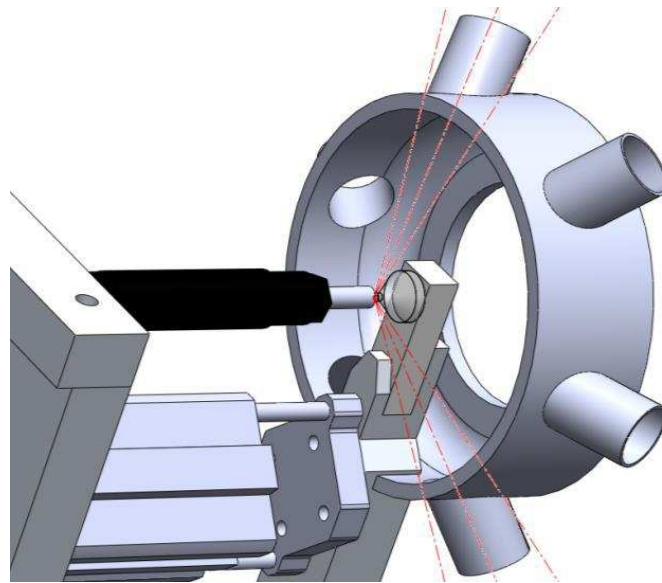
Isometric view of injector, mounts, and fuel spray extract assembly.
